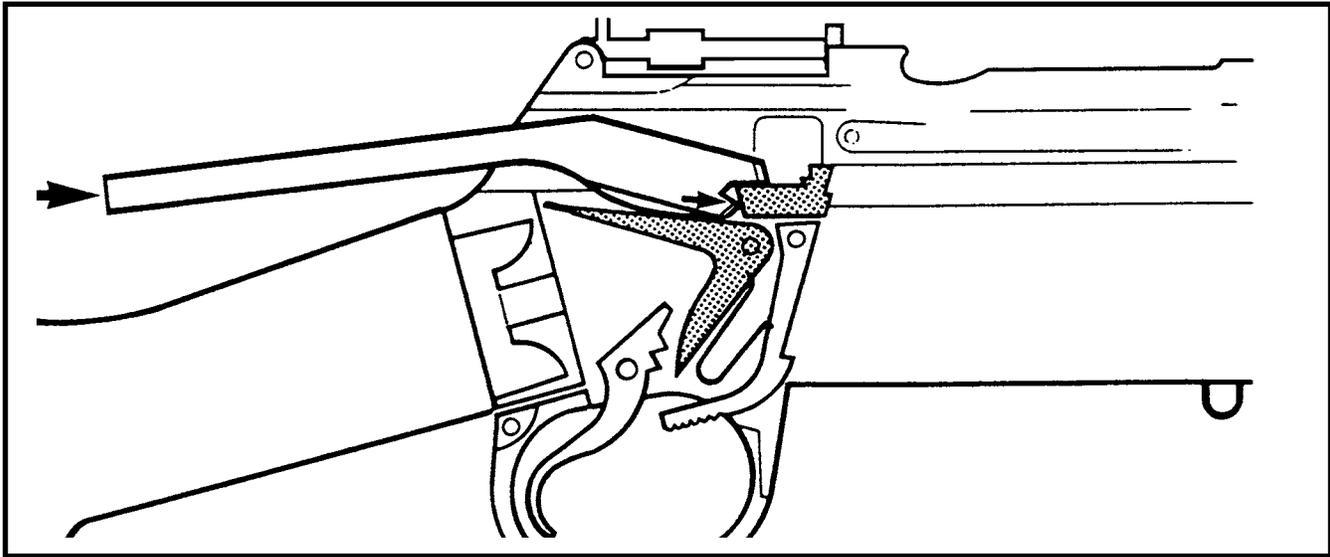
Position of the Sear Stop Adjusting Tool
